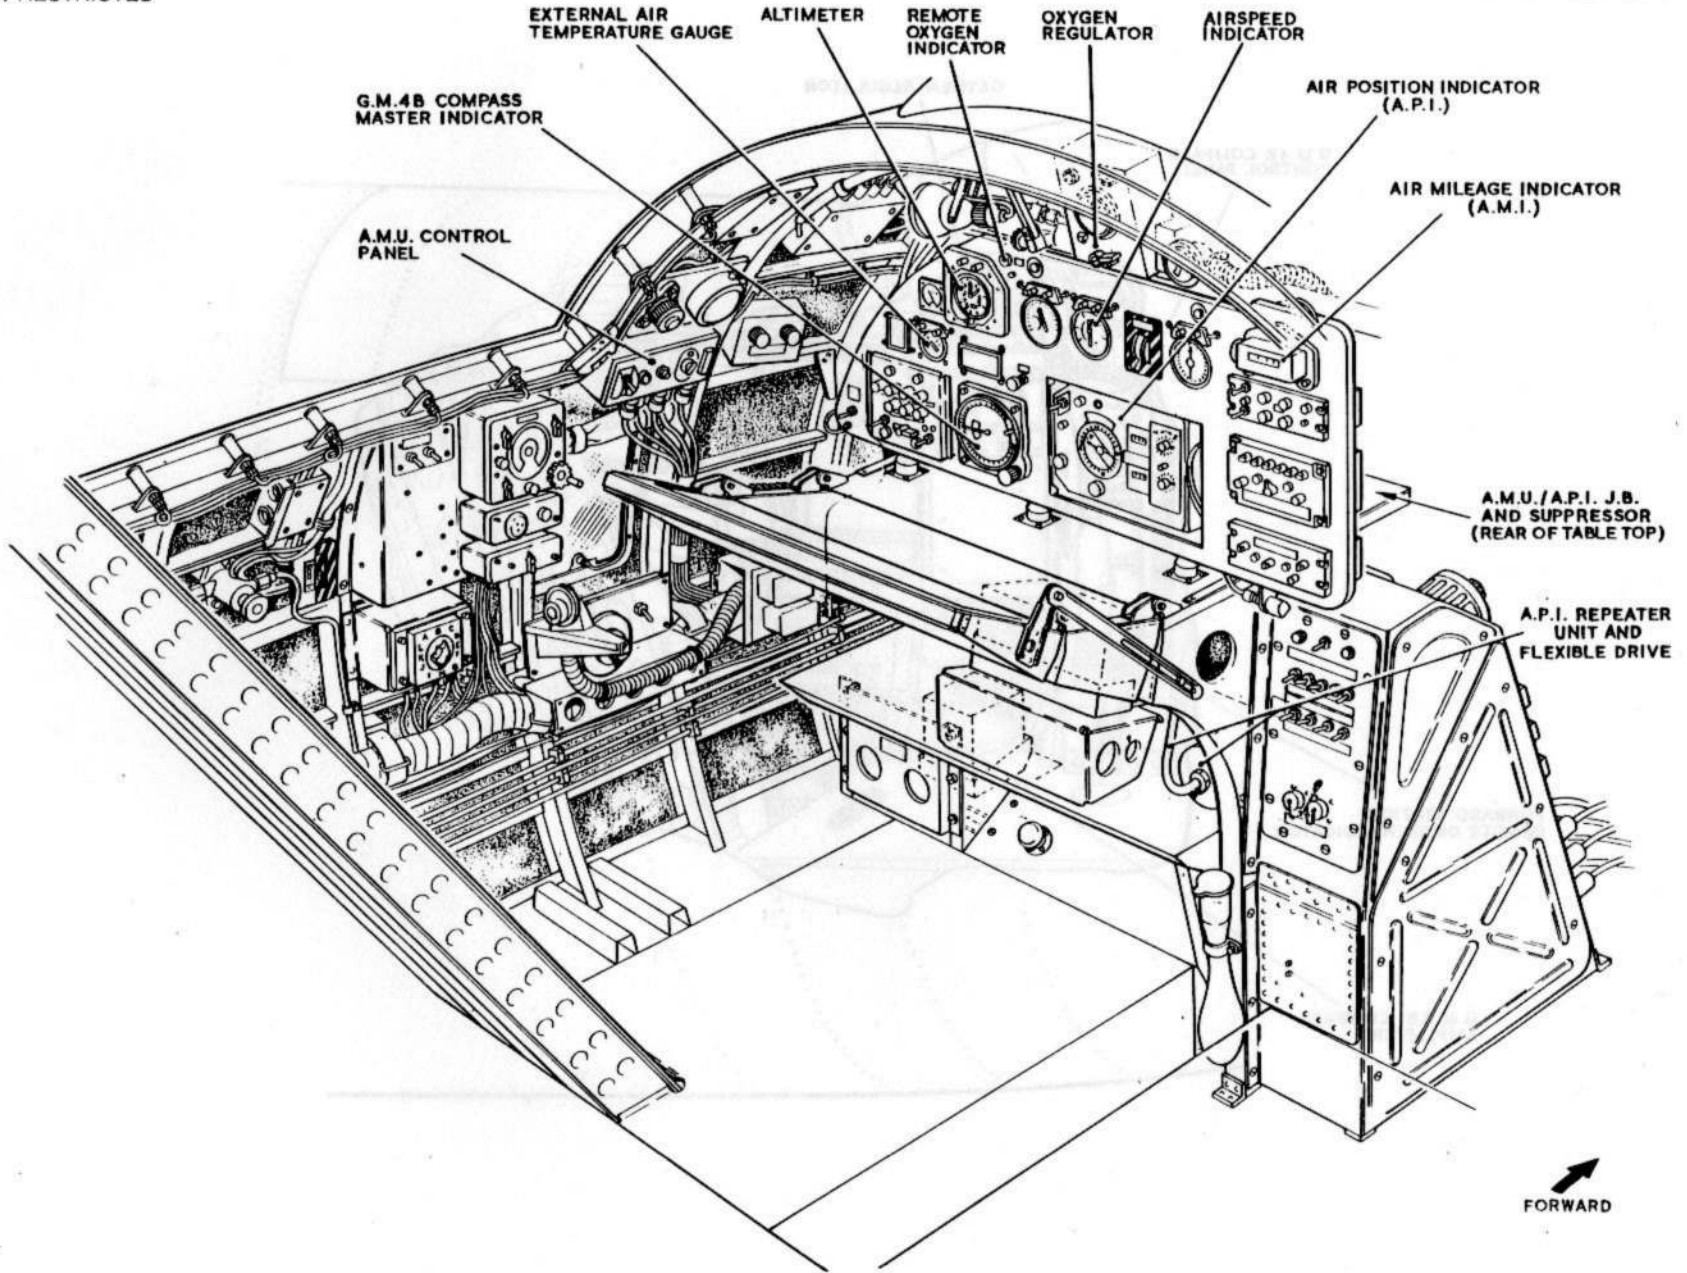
INSTRUMENT INSTALLATION — 1st NAVIGATOR'S STATION
